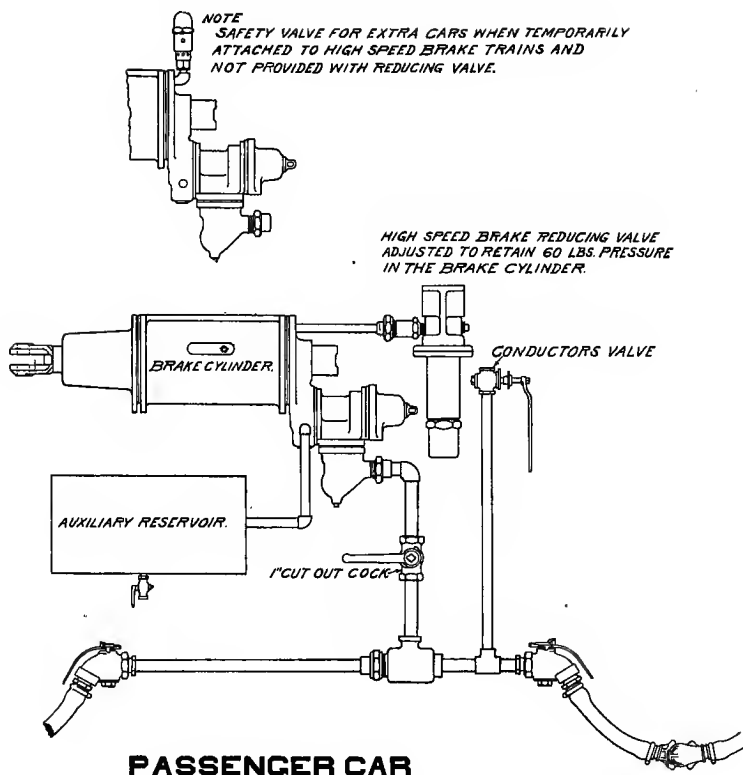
HIGH-SPEED PASSENGER BRAKE.
